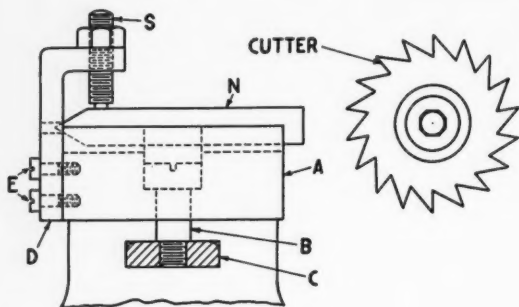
Simple Cross Slide Fixture for Milling Slots in Screws and Similar Parts
